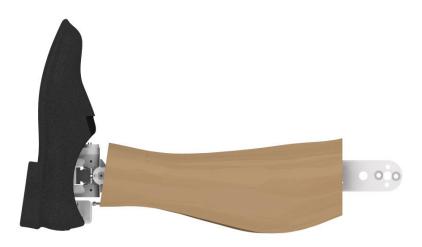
Completed THOR-LX Foot, Ankle and Lower Leg Assembly
